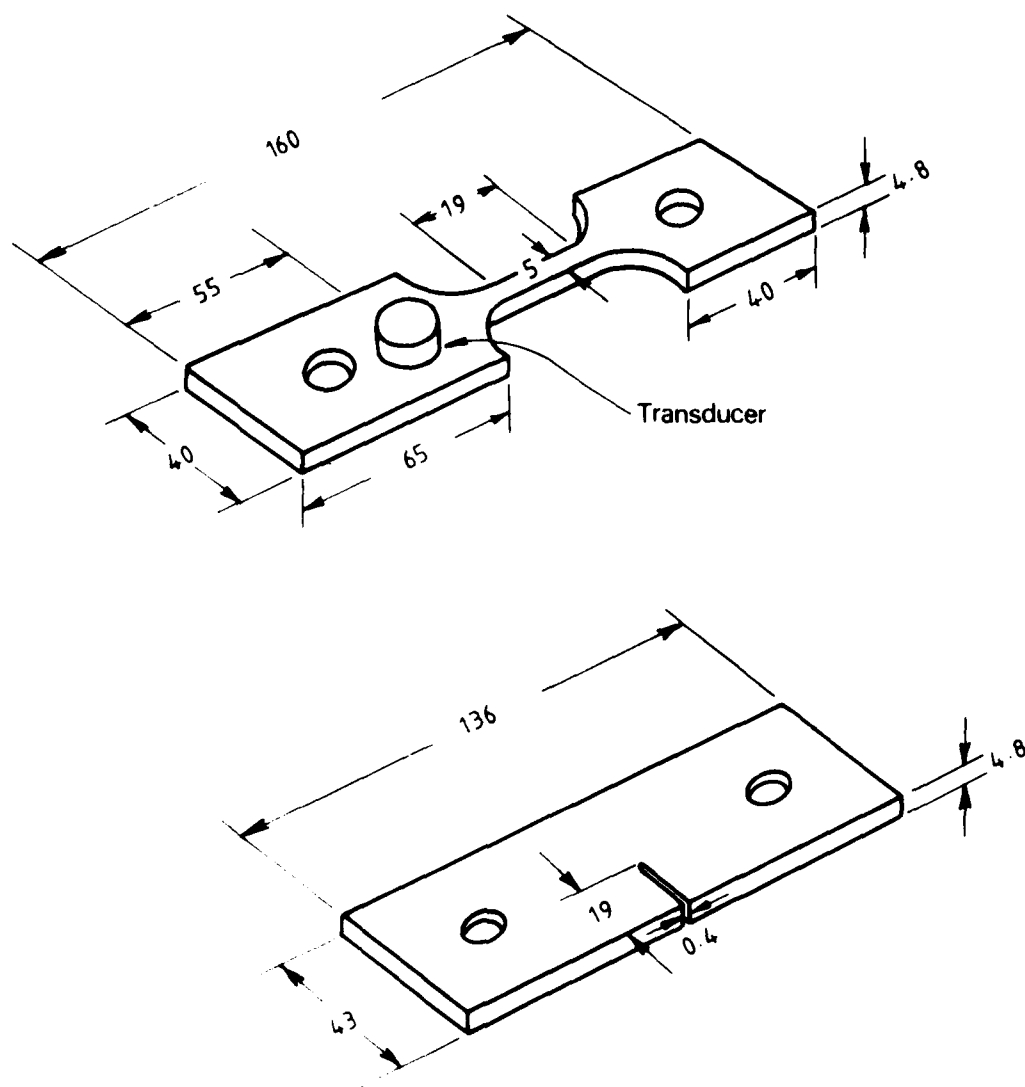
Tensile specimen and SEN specimen; dimensions in mm.
